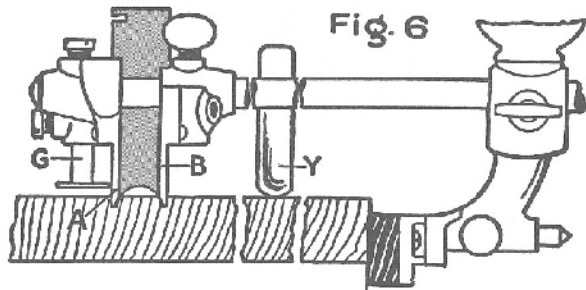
CENTER BEADING—Attach Cam Rest (Y) to either Arm between Sliding Section and Fence to steady Plane. Attach Fence, and Plane will cut bead five inches from edge of stock. Extra long arms can be furnished on special order which will permit a bead being worked eight inches from edge of the board.
